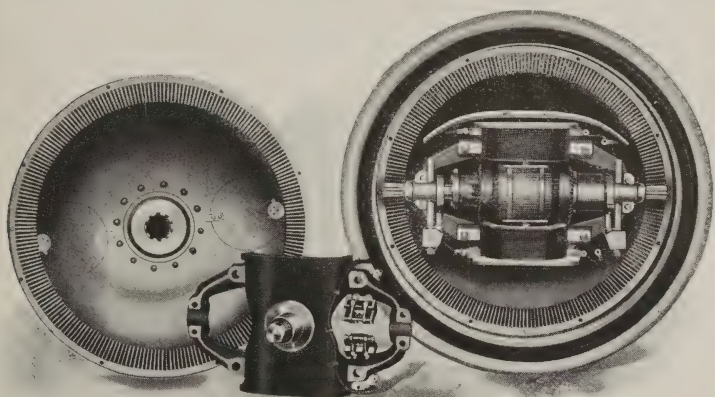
"Couple-Gear" Wheel with Side of Wheel and Front of Motor Casing Removed, Showing Arrangement of Armature, Poles, and Bearings
